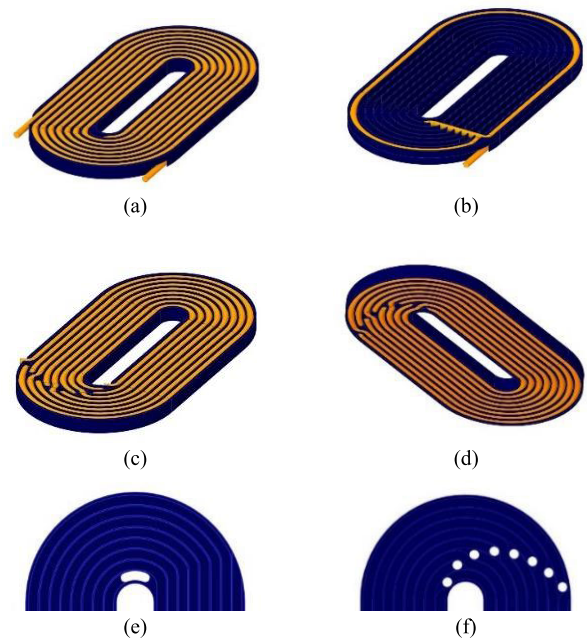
3D model of the two-layer stacked bobbin. (a) Bobbin and winding of U-type winding method. (b) Winding arrangement for Z-type winding. (c) Bobbin and winding of serpentine winding method. (d) Lower side of serpentine winding. (e) Groove arrangement for U-type winding. (f) Groove and holes arrangement for serpentine winding.
